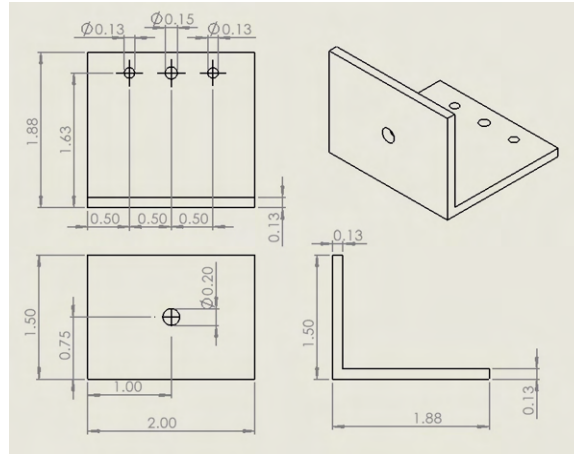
This figure shows the engineering drawing of the L bracket that attaches the slider arm to the brake mechanism.
